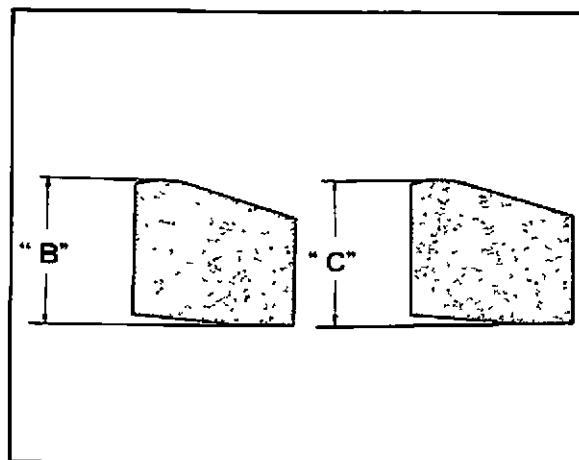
Carbon Shoe Inspection www.cruisercult.com
